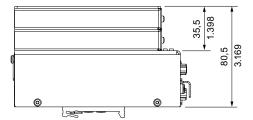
Dimensional drawings of the device with vertical mounting brackets
